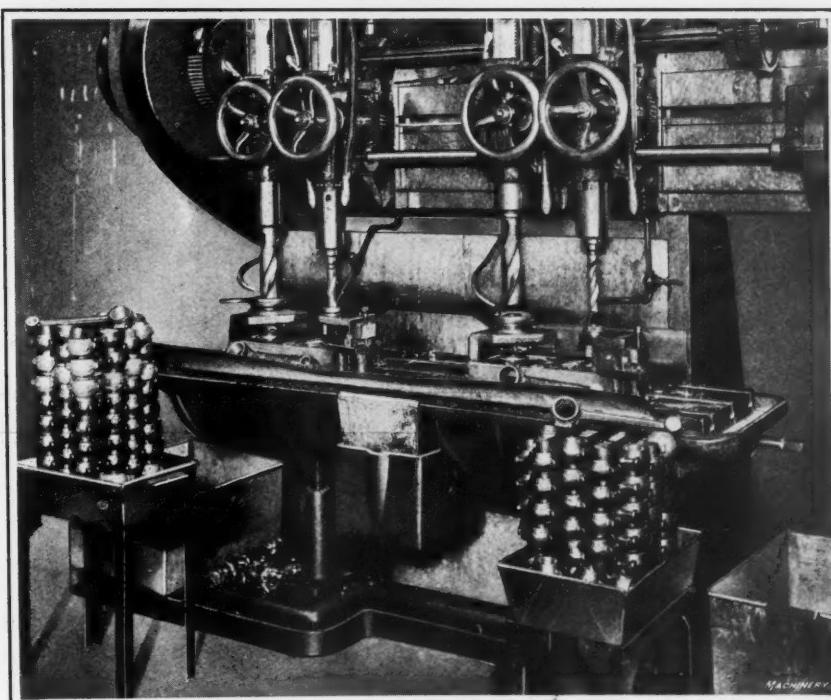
Four-spindle Drilling Machine built by Foote-Burt Co. engaged in simultaneously drilling Both Holes in Two Connecting-rods
